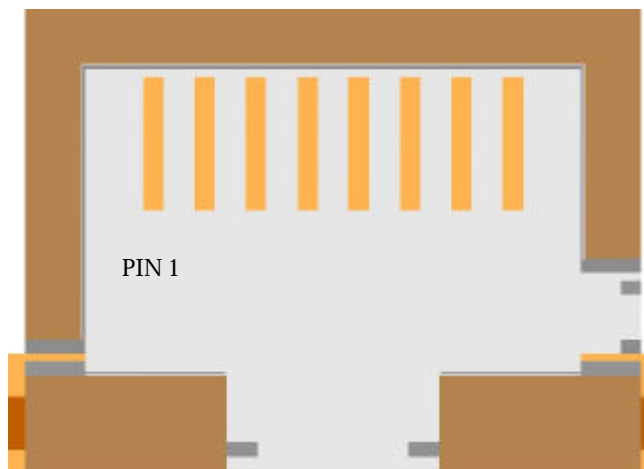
J2 OUT CONNECTOR FRONT VIEW
